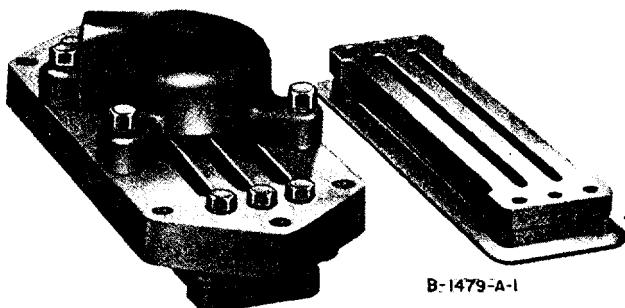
A-2—Type "A" rectangular channel valve Inlet with free-air unloader assembled at left, Discharge at right.
